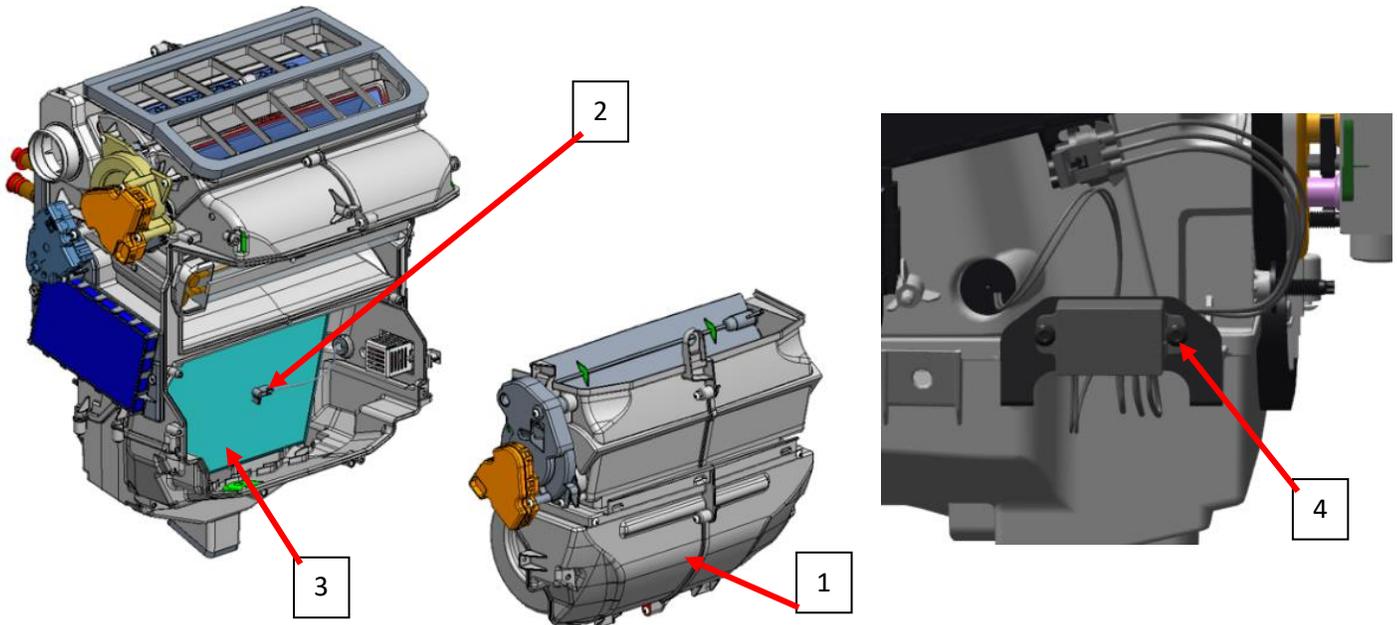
HVAC Unit w/ Separated Blower Scroll Housing
